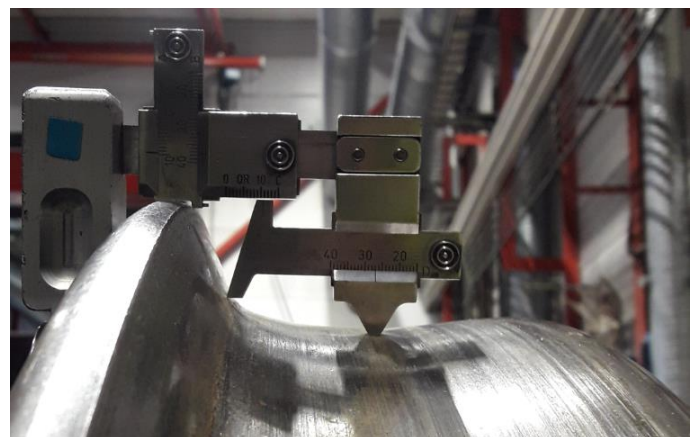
Physical measurement 5mm treadhollow, 37.5mm flange height. Left wheel, axle 2 on wagon 5095
